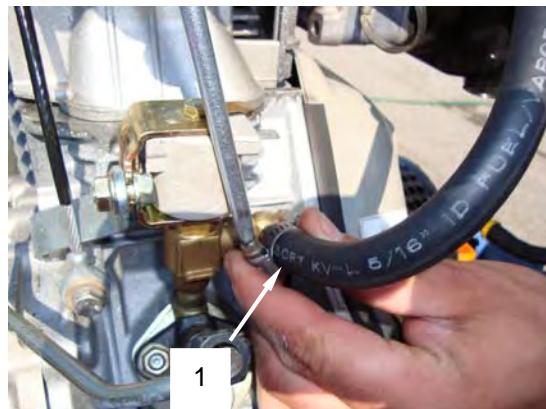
Remove Hose from Engine Shutdown Solenoid Fitting.
